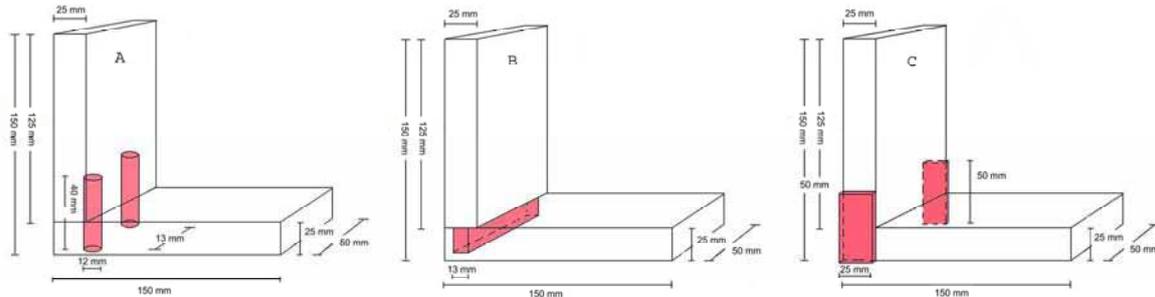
Dowel corner joint (A), Mortise - Tenon corner joint (B), Gusset Plates corner joint (C)
